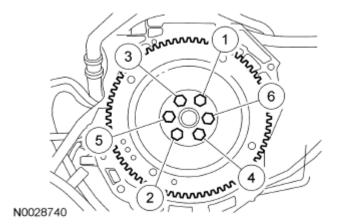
Identifying Tightening Sequence Of Flexplate Bolts Courtesy of FORD MOTOR CO.
